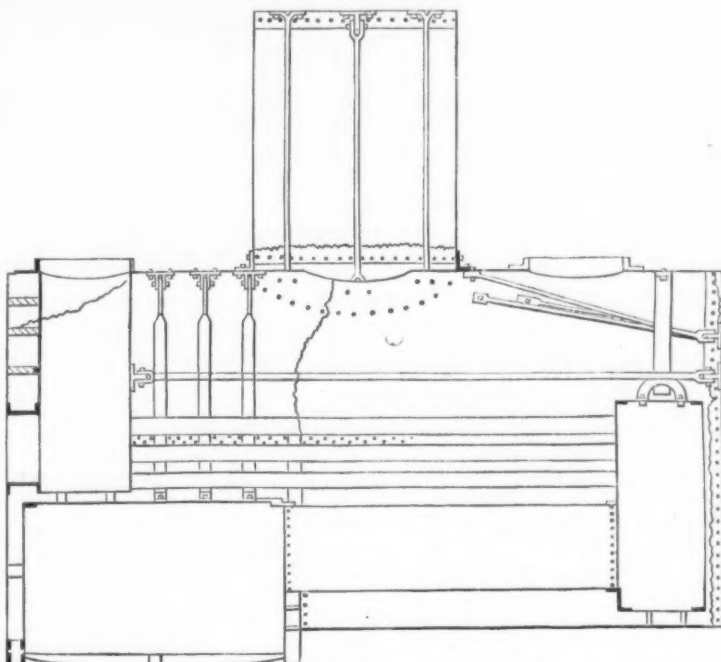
Vertical Section of Tug-Boat Boiler, Showing Bracing.
